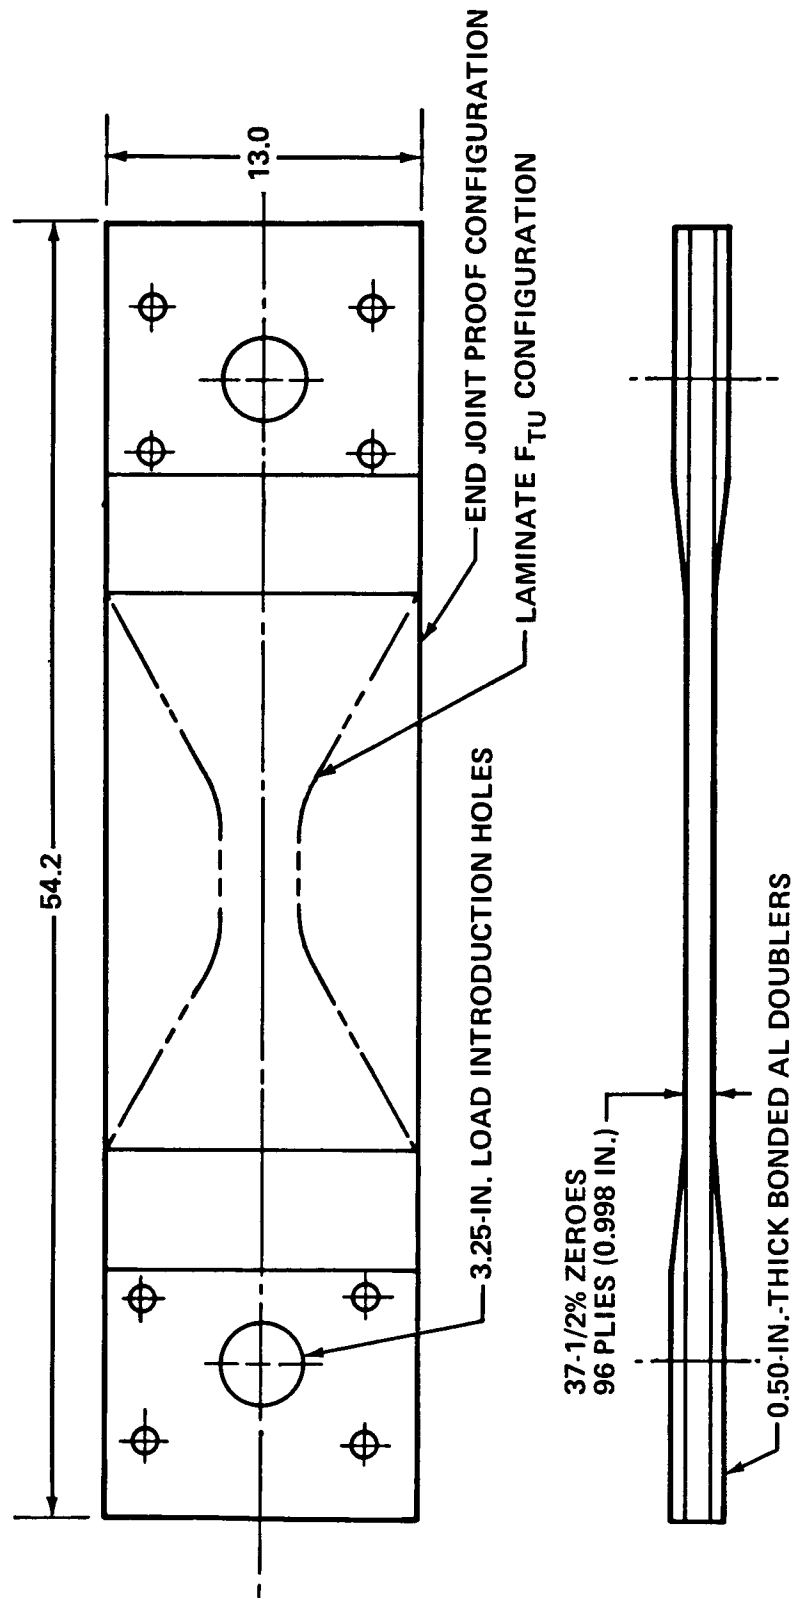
END JOINT PROOF TEST SPECIMEN
